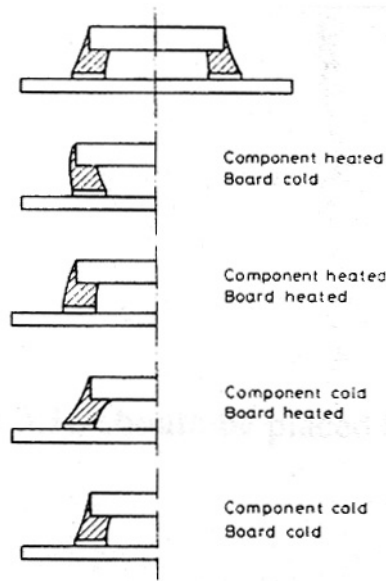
Solder joint fatigue in surface mounted assemblies is often caused by power cycling.
